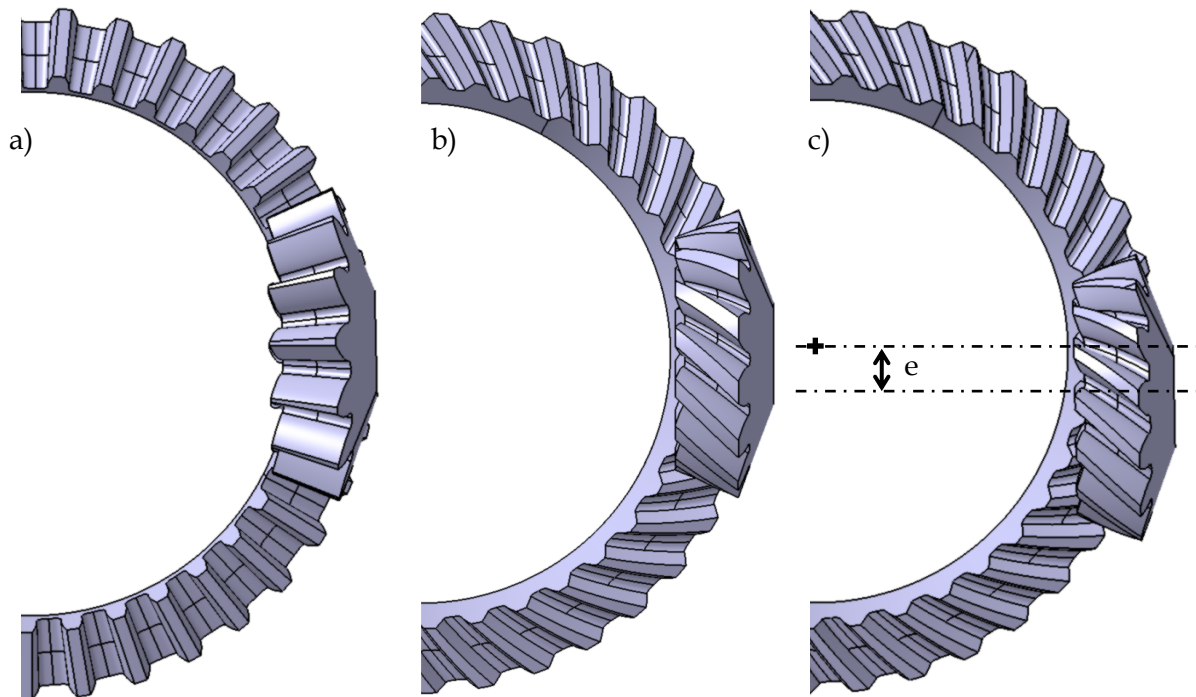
Scheme of a) a spur bevel gear pair, b) a spiral-bevel gear pair and c) an hypoid gear pair with offset e
